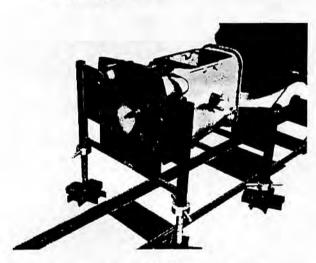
SHIFTER RAILS AND PEDAL SHAFTS REMOVED
